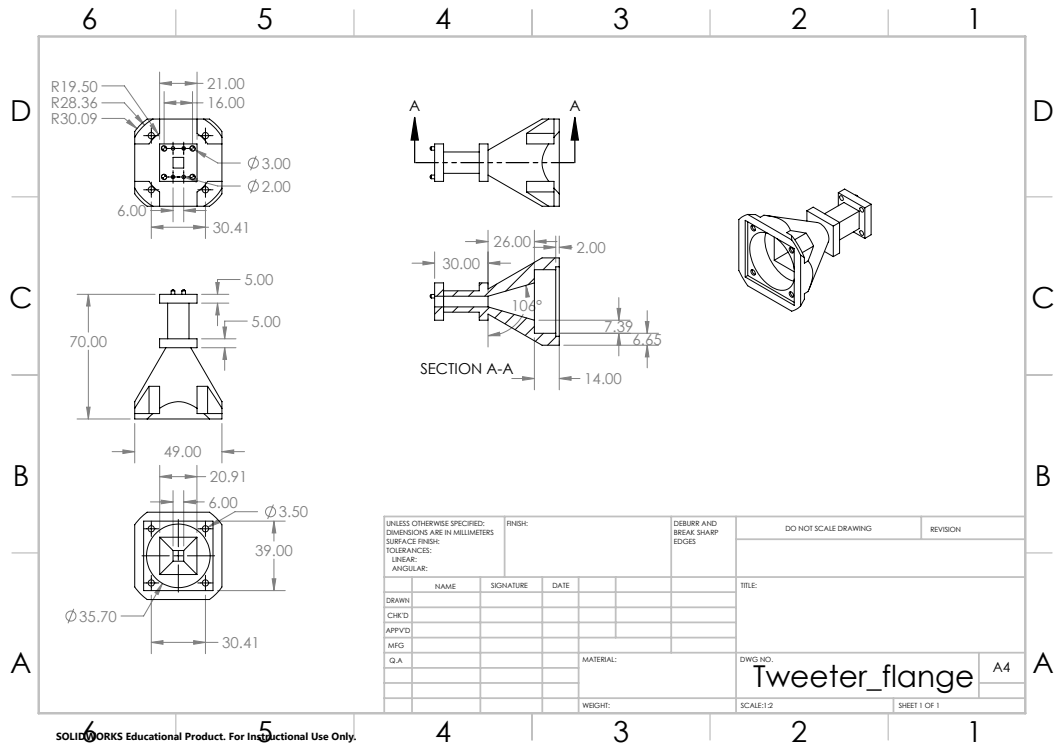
Mechanical drawing for the horn waveguide section that connects the loudspeaker to the directional coupler for the 10–20 kHz band.
